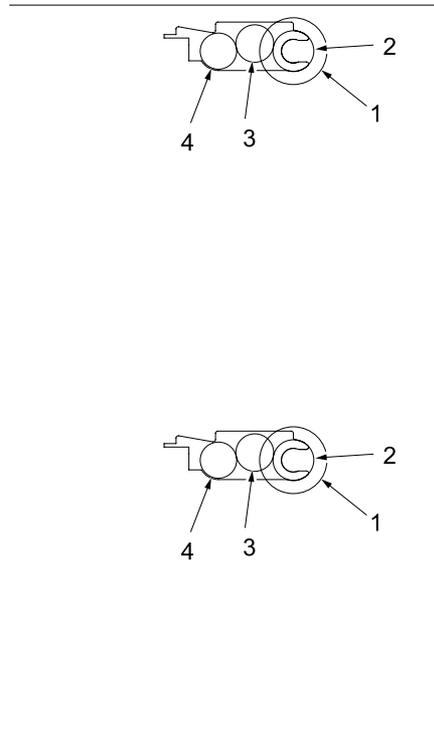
Drive system 1 (primary paper feed unit)
